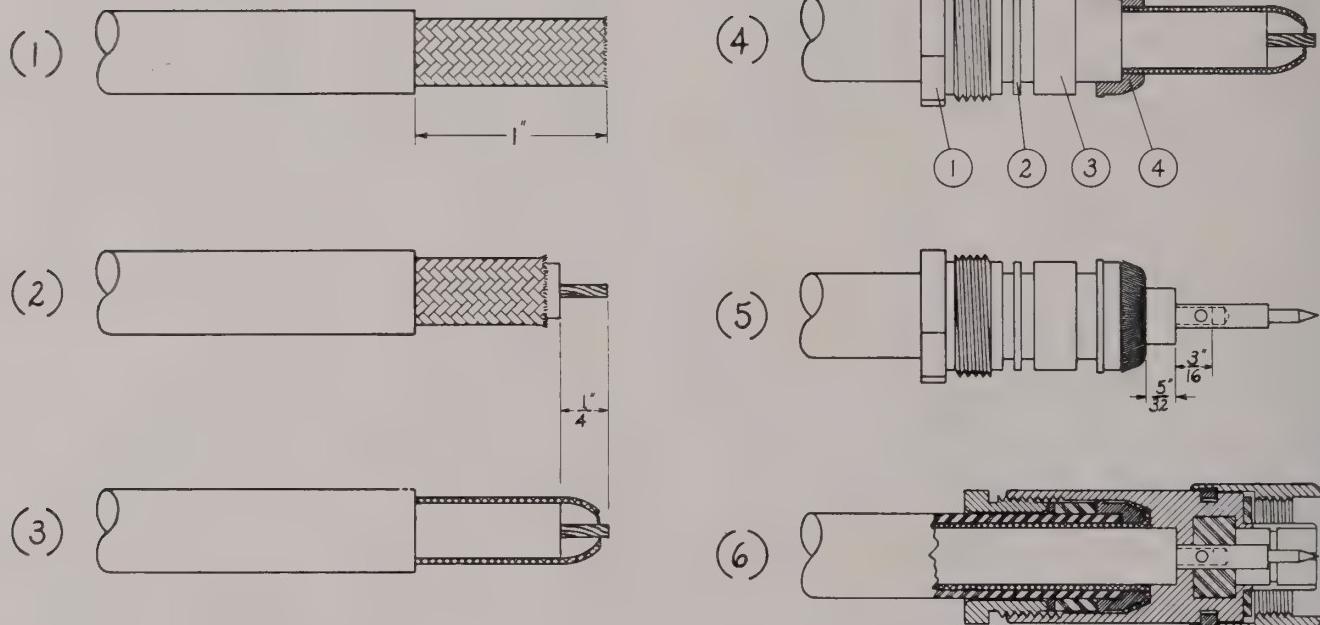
Attaching Connectors UG-21B/U to Cables RG-9A/U
